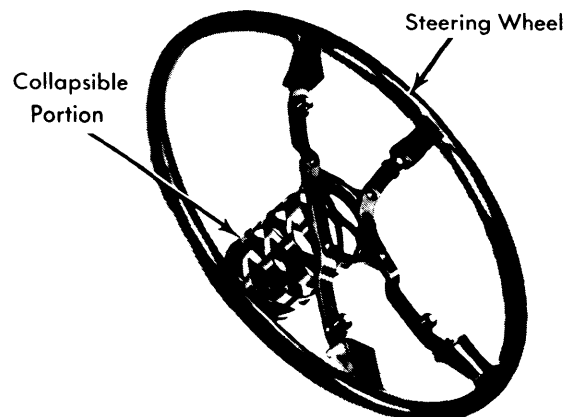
Typical Volkswagen Steering Wheel Assembly
